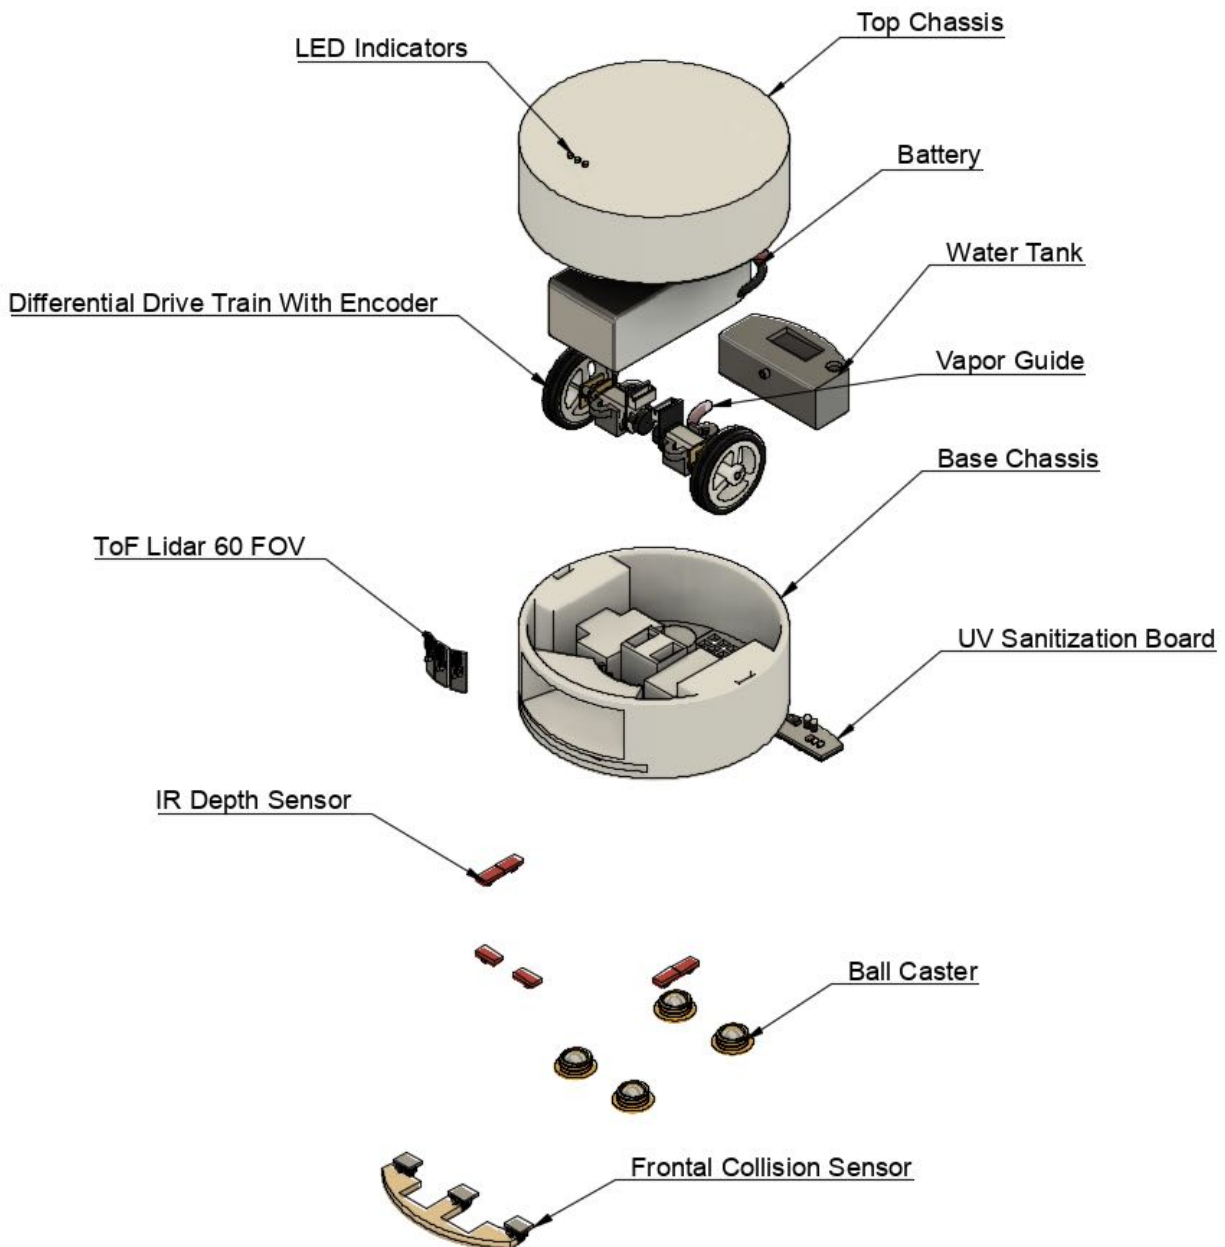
Detailed mechanical design in CAD (Exploded View) with labels
